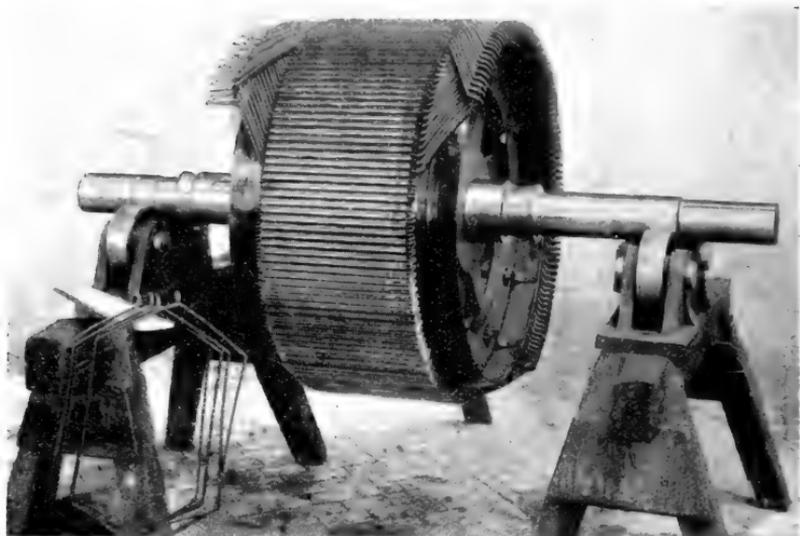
Assembling Strip-wound Coils (Alioth Co.).
